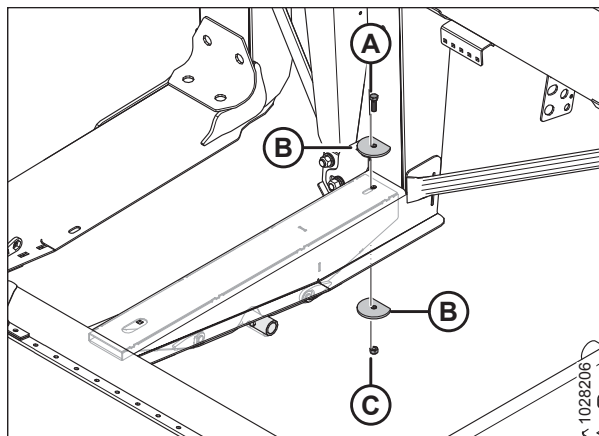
Inboard Arm Assembly and Left Header Leg – View from Above
